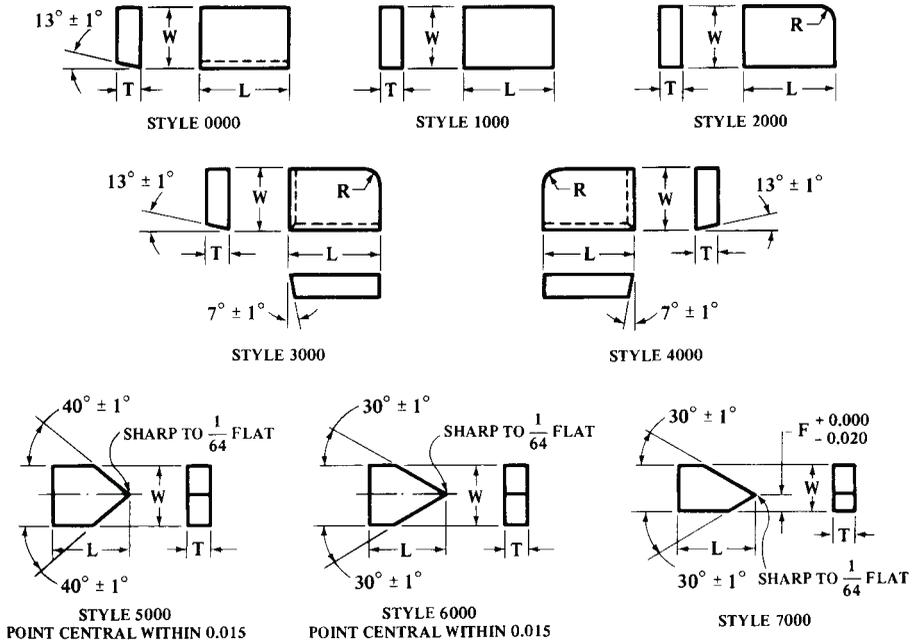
Eight styles of sintered carbide blanks (see Table 4.)
